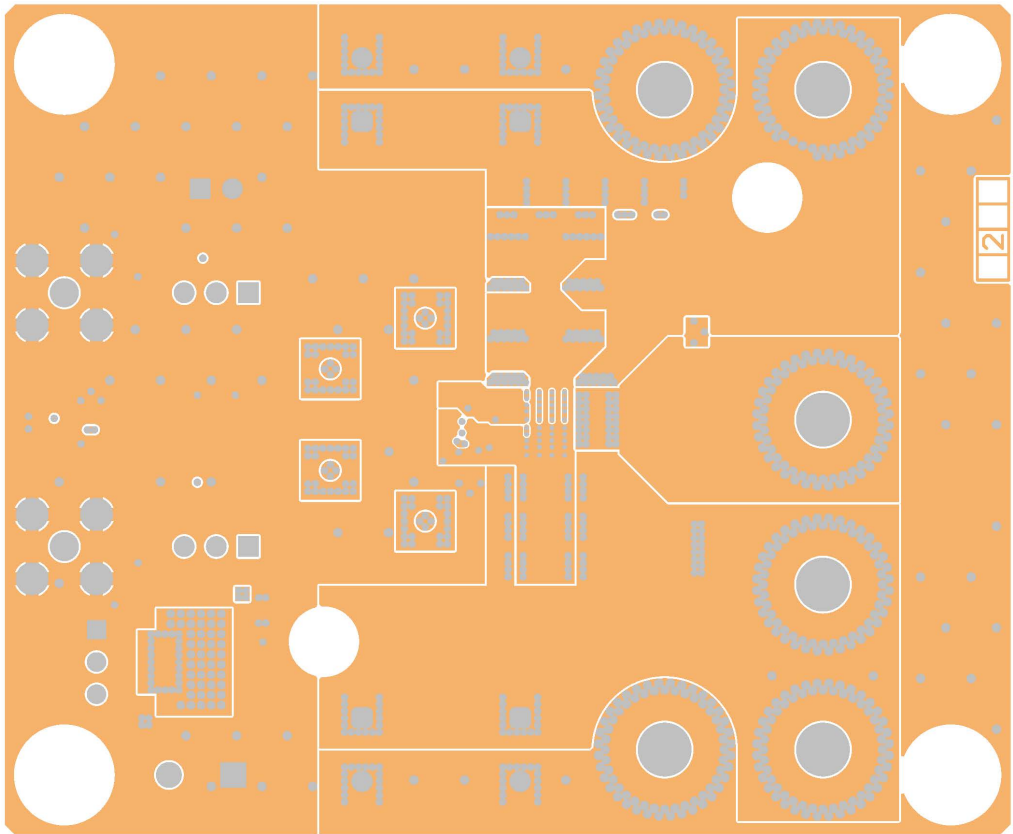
NX-HB-GAN3R2-BSC PCB inner layer 1
